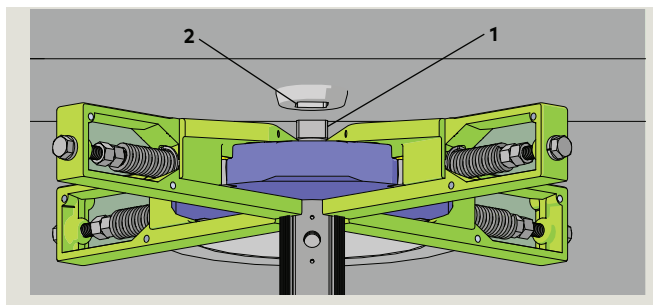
Top plug secured in overhead speed control drive shaft
